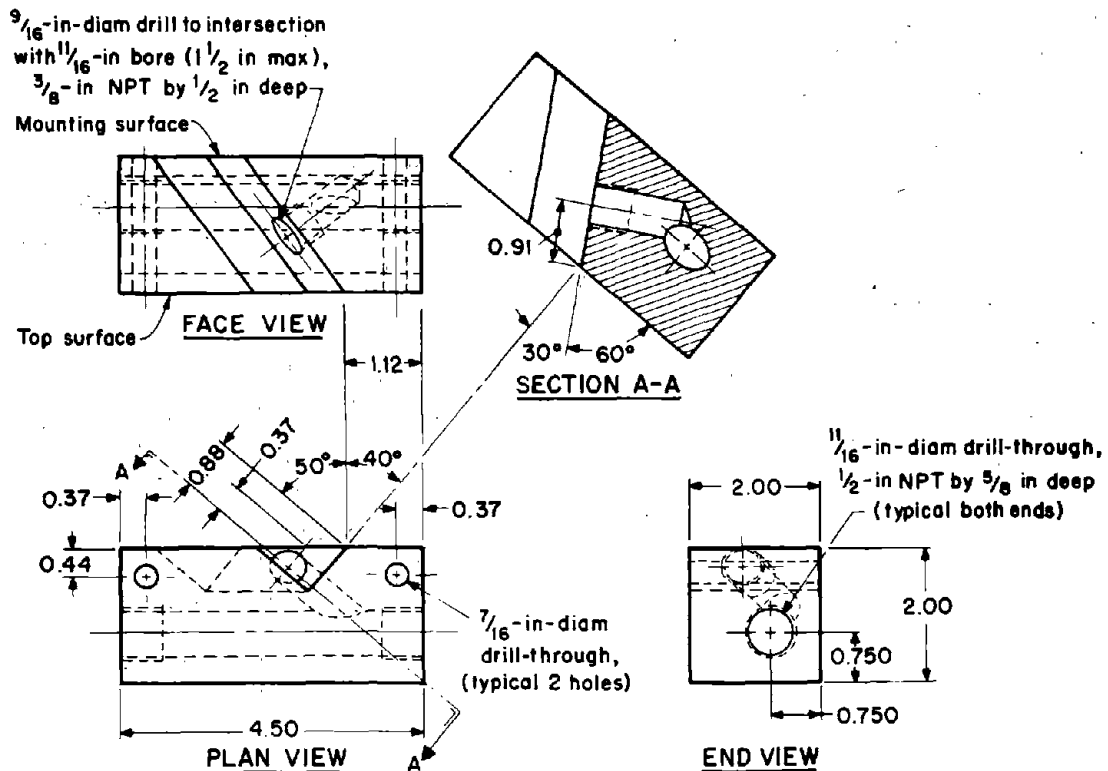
Water spray manifold 3. All dimensions are in inches.
